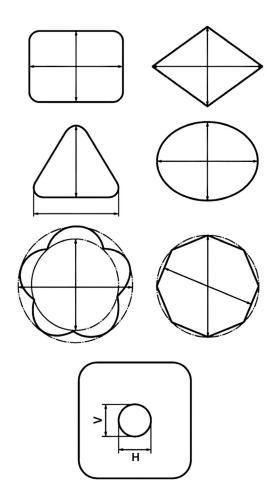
Scheme for measuring the dimensions of adhesive plates:
